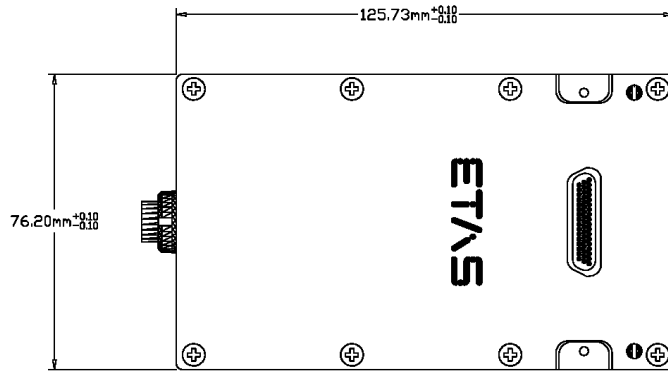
ETKS3.0_SET Dimensions - Top View, no Glenair Cover
